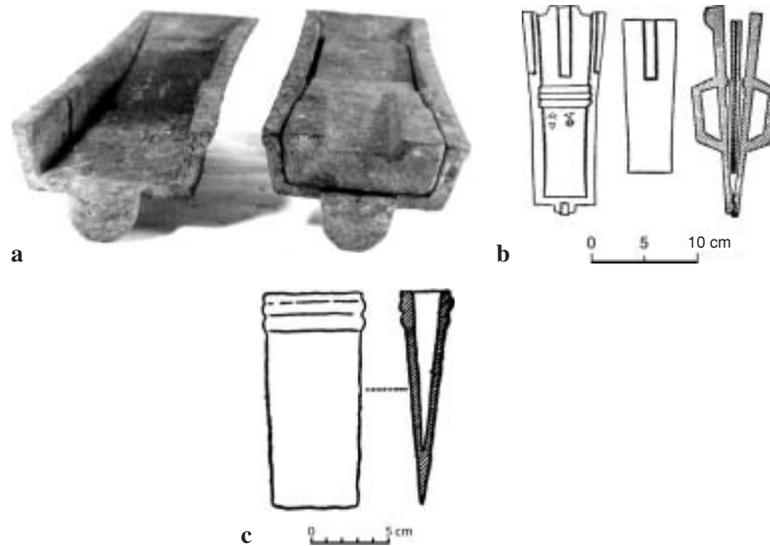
Three-section cast-iron mould for casting an iron axehead, from the Warring States iron-foundry site in Xinglong County 興隆縣, Hebei. a. Photograph of the assembled mould. b. Sketch of the parts of the mould. c. Sketch of an axehead from the same site. Sketches reproduced from Zheng Shaozong (1956, pp. 33, 35, figs. 5, 9); photograph supplied to Joseph Needham by the Chinese Ministry of Culture through Rewi Alley.
